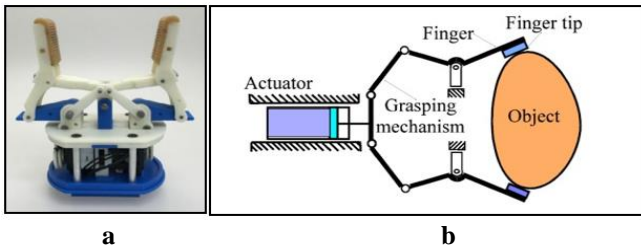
(a) Robotic gripper with 2 Fingers (b) Mechanical design for 2 Finger Gripper
